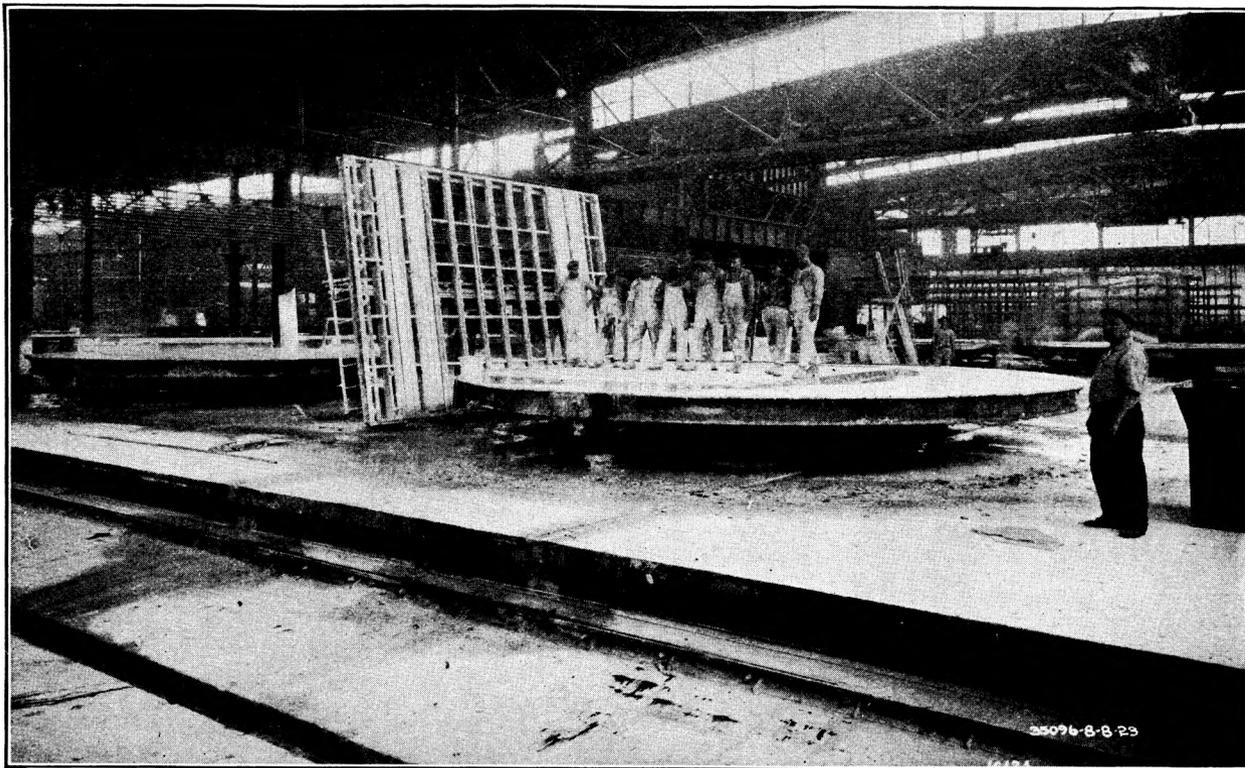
DISCONTINUOUS PROCESS: LAYING OUT TABLE PREPARATORY TO SWITCHING IT TO GRINDING MACHINE
